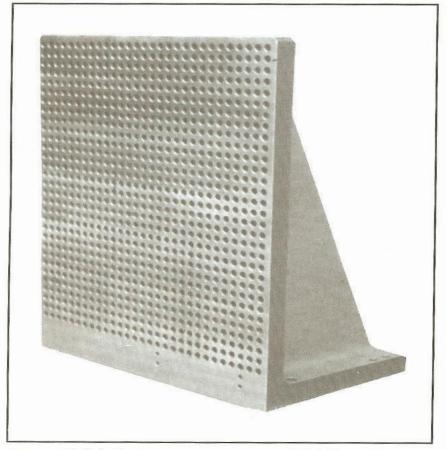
Angle plates. (Courtesy Mid-State Machine Products)
